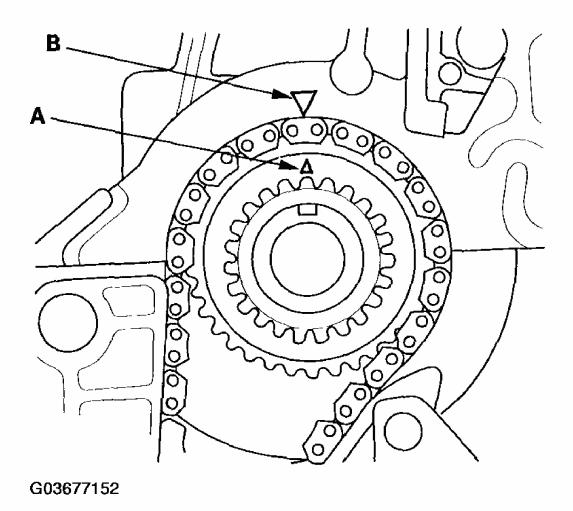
Aligning TDC Mark On Crankshaft Sprocket With Pointer On Engine Block
